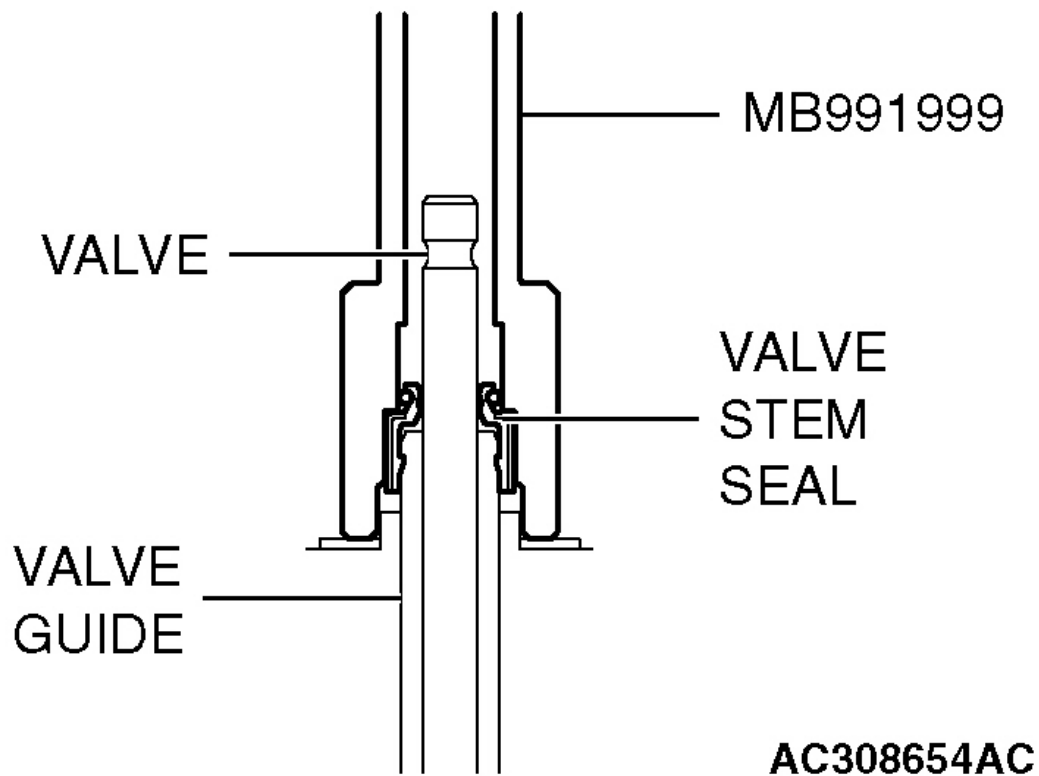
Identifying Valve Stem Seal In The Valve Guide Using Valve Stem Area
